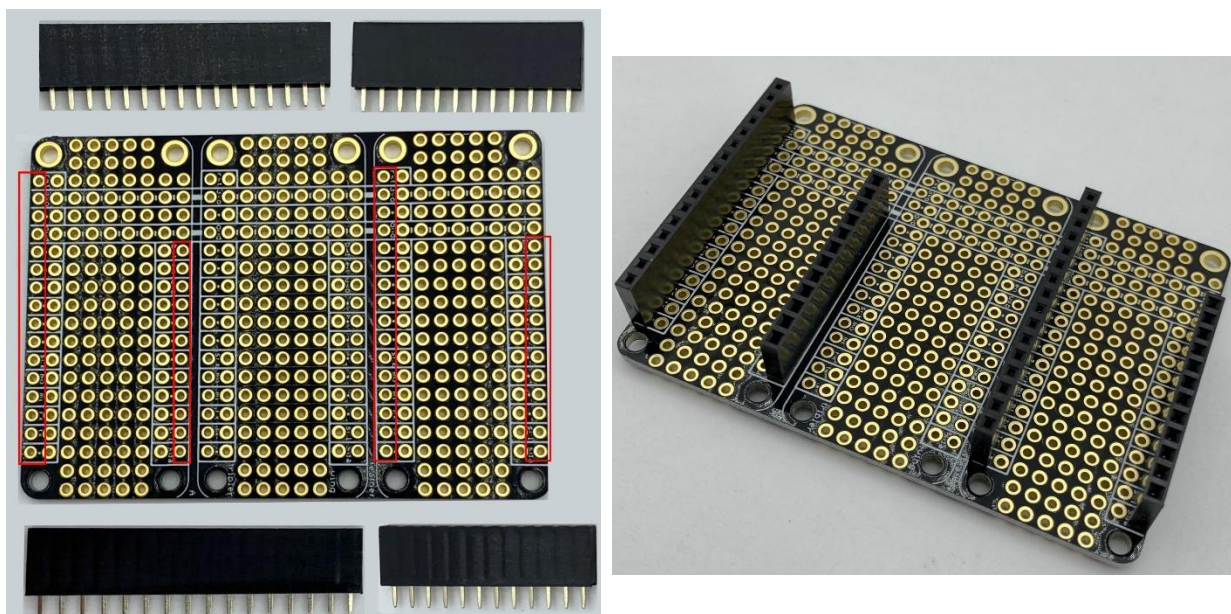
Tripler with headers separate and placement shown with red outlines (left) and assembled (right).
